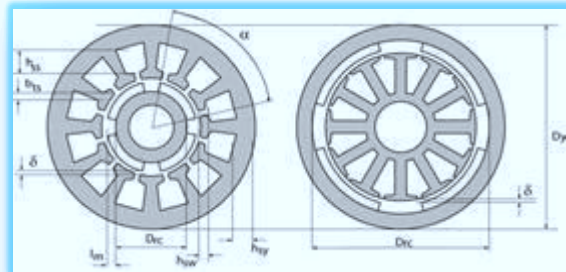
Cross section of an inner rotor and an outer rotor (10)
